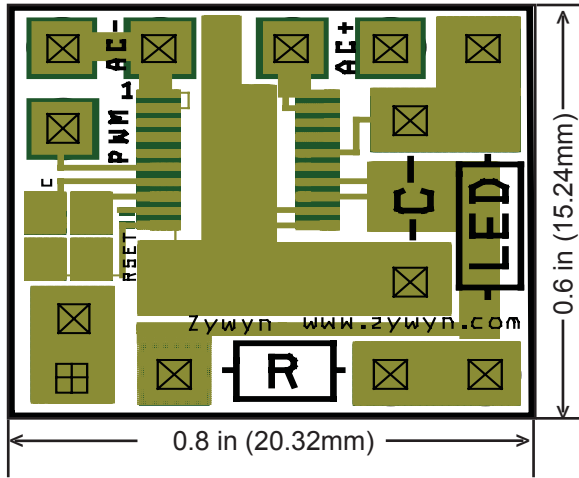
ZD832EVB Single-Layer Evaluation Board Component Side Layout
